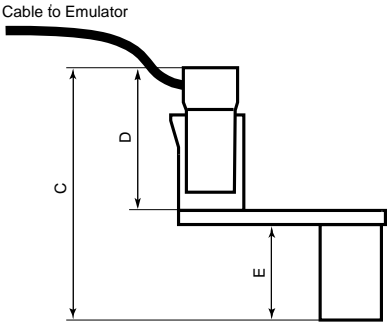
Dimensions of the ADA-JDS-MPSD adapter. Side view. C = 24 mm (.95 in.), D = 14.7 mm (0.58 in.), E = 8.5 mm (0.34 in.).
